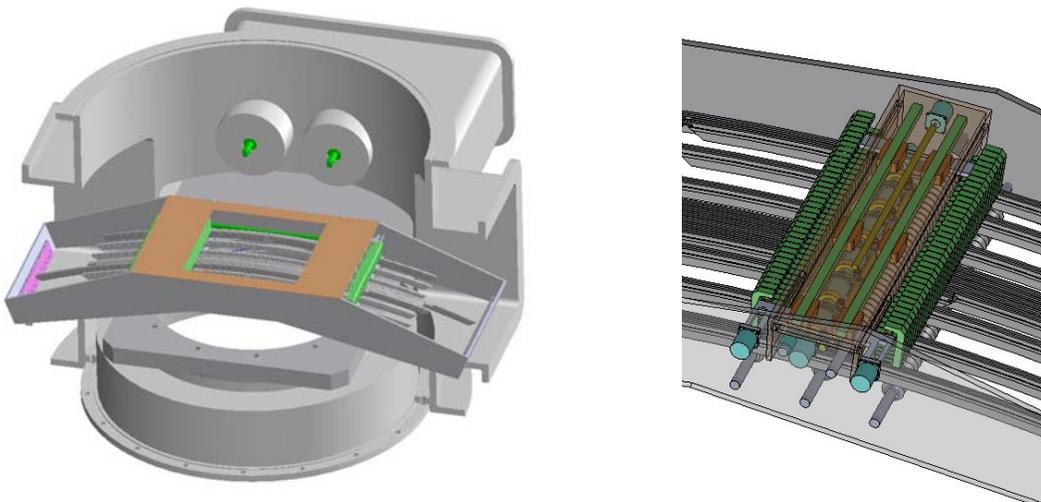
Left, the slit robot assembly in the focal surface. Right, one of two identical drive assemblies for the opposing slit bar pairs. The green L-shaped parts on the outside of the drive assembly are flexured locking assemblies that are released to move the slit bars. Stepper motors release the appropriate locking mechanisms and engage the drive gears to initiate a slit bar motion.
